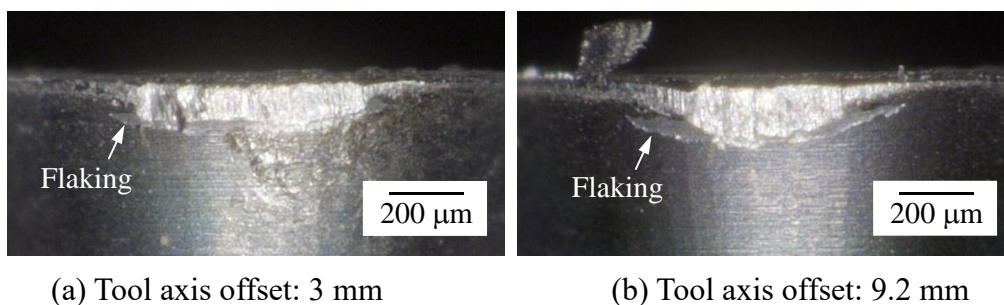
Flank face of the nose radius after the initial machining in tool life experiment.
